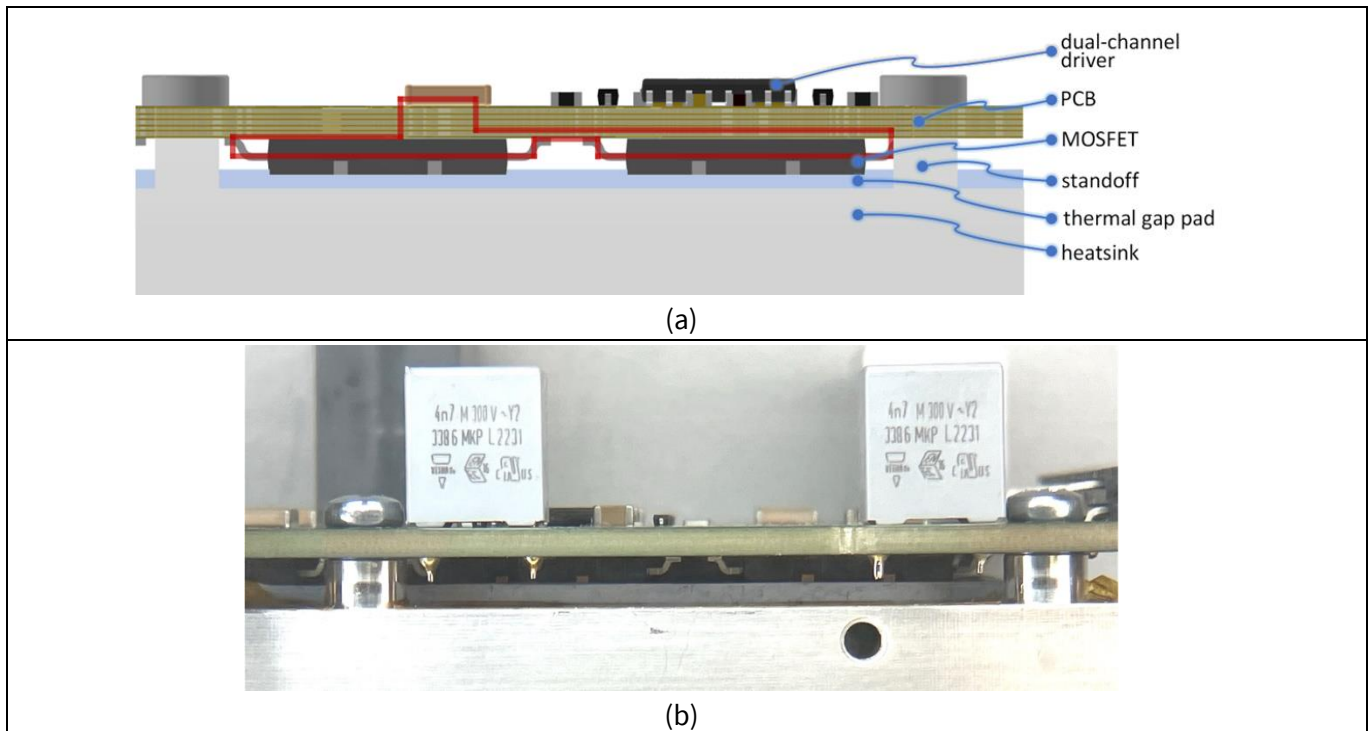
Cross-sectional view of the switching cell. (a) Captured in the PCB CAD software; (b) Real hardware in photo
